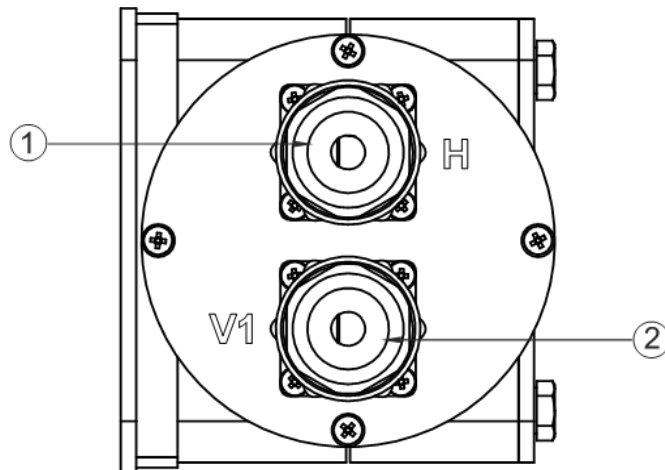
Dimensioned drawing EBM Electronic Box
